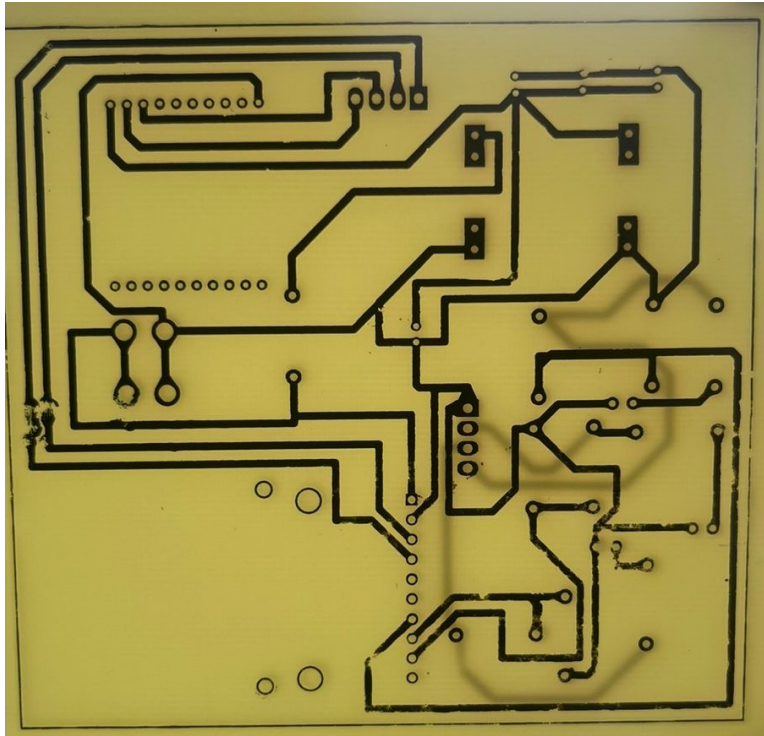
Flight-computer PCB after chemical etching, bare board stage
